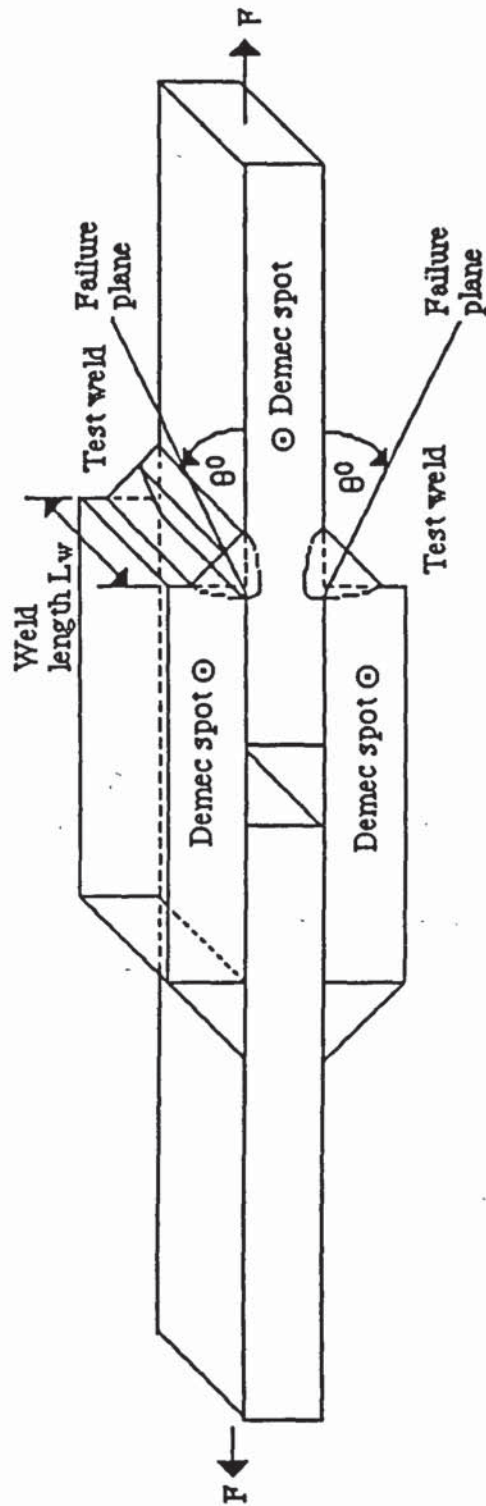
Test welds of the transverse fillet welded specimen.
